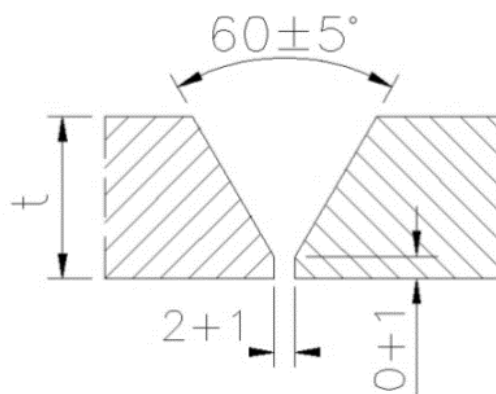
The welding preparation, thickness  $t = 8$  mm
